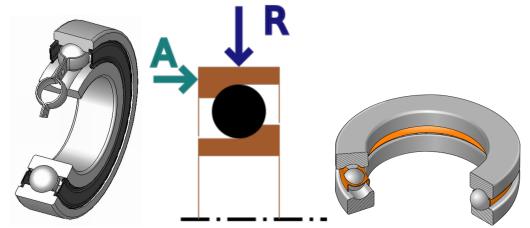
Different ball bearing types. Left: a deep groove ball bearing[59], middle: section view of an angular contact bearing[60], right: a thrust ball bearing[61].
